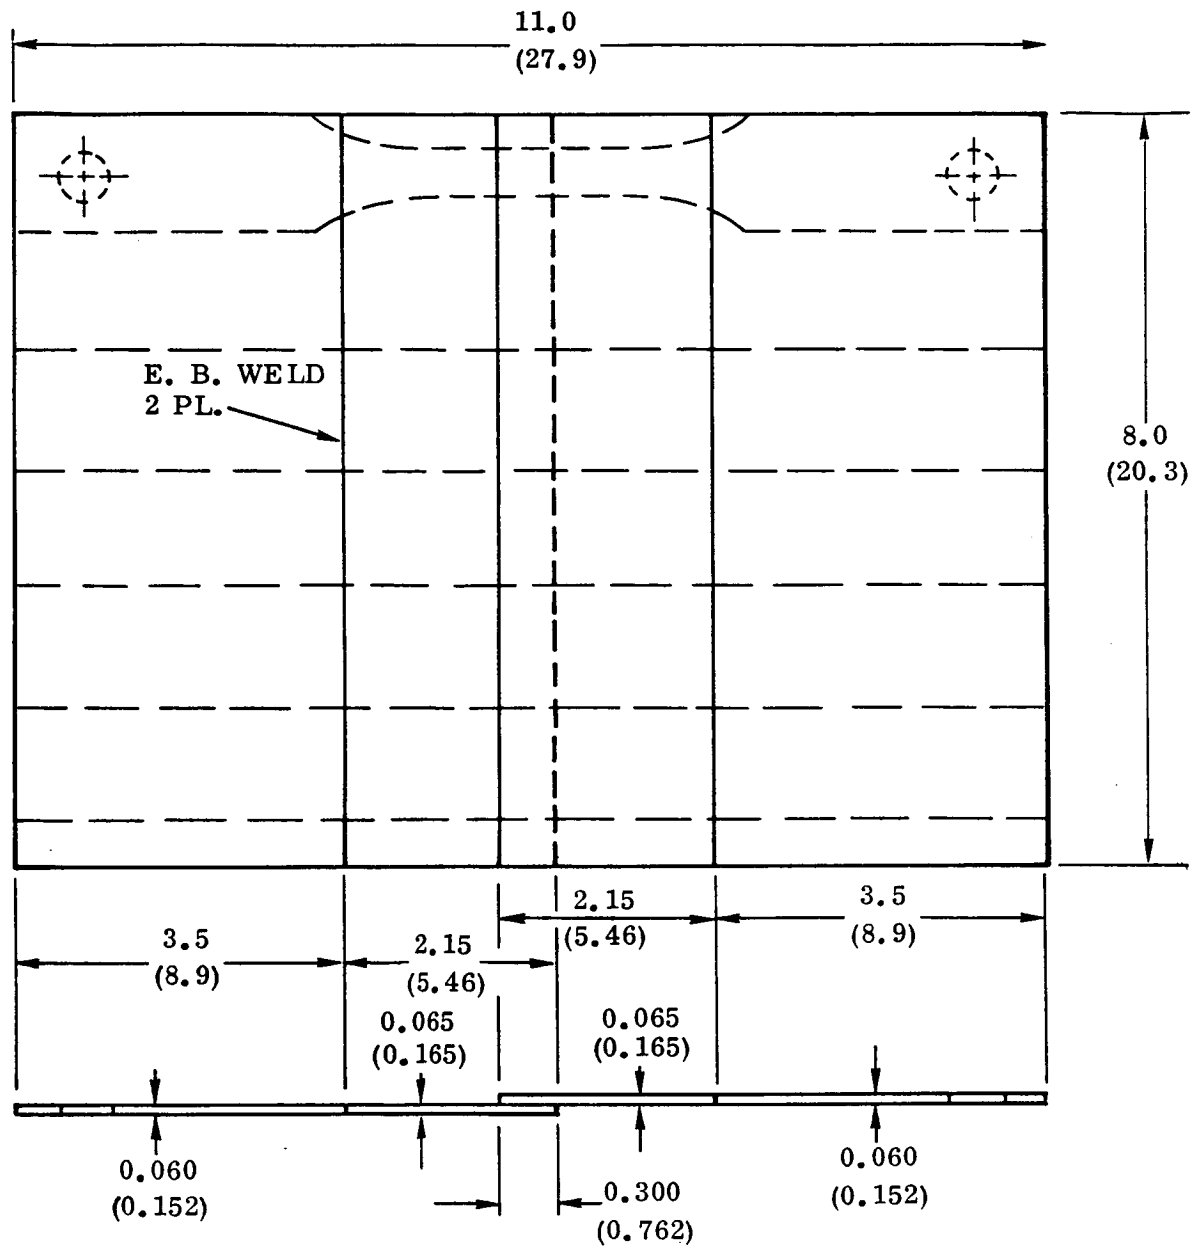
Cb-752/Ti-33 Cr Braze System Test Specimen
